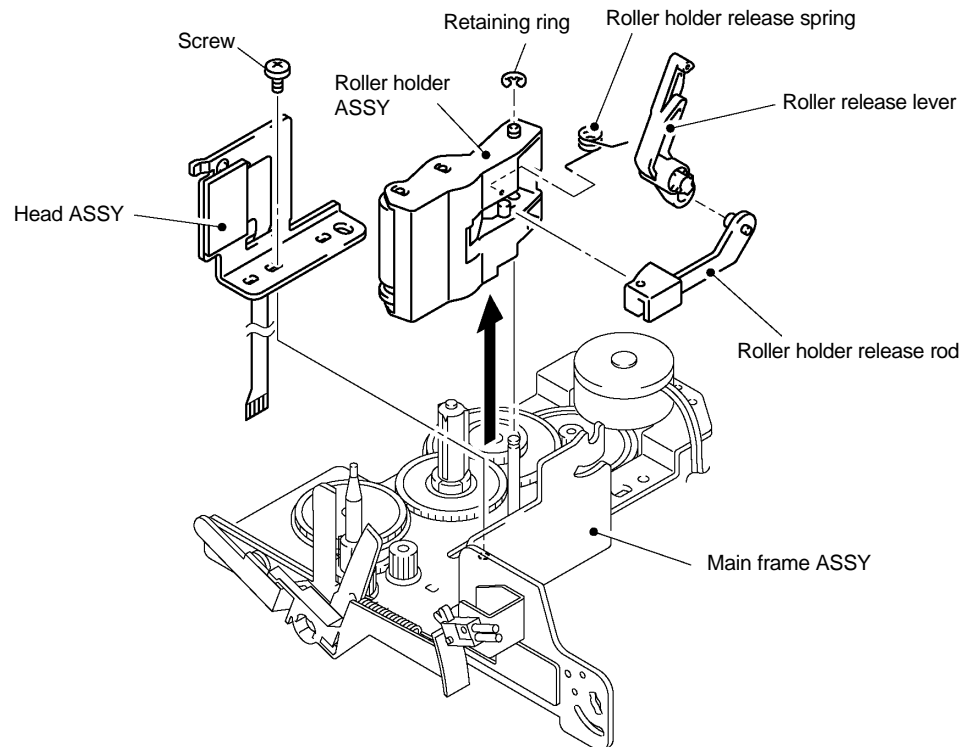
Disassembling the Roller Holder ASSY and Head ASSY
